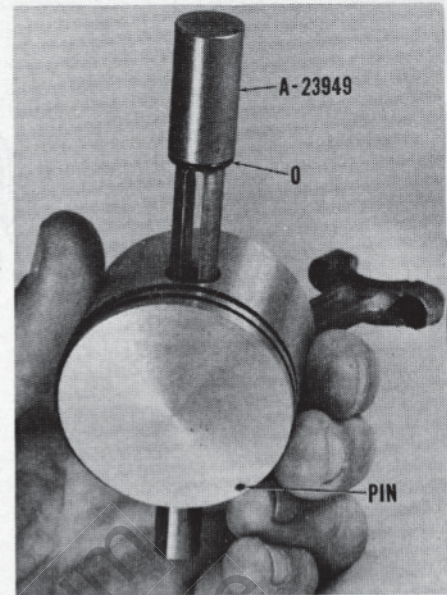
On models with Spirol pin retaining piston pin, use Homelite tool No. A-23949 to push piston pin out. Note "O" ring (O) which protects piston from damage by tool. Note piston ring retaining pin.
